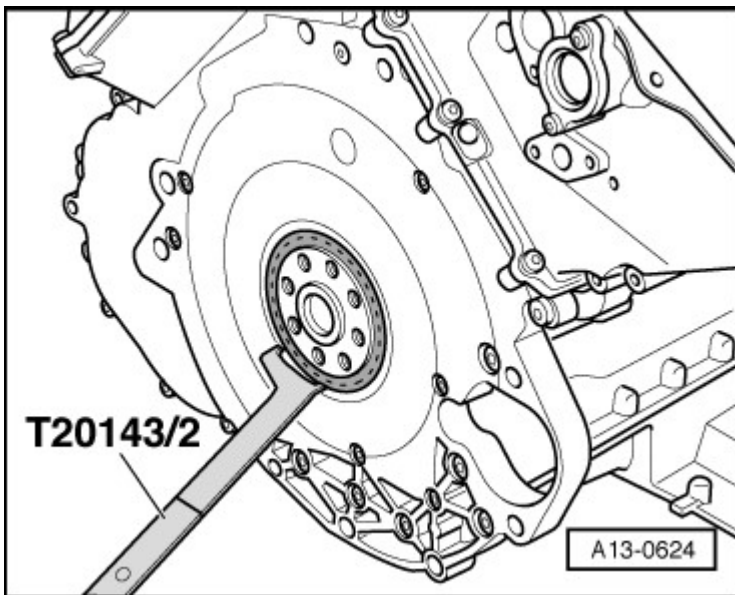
Prying Out Sealing Ring Using Extractor Lever T20143/2
